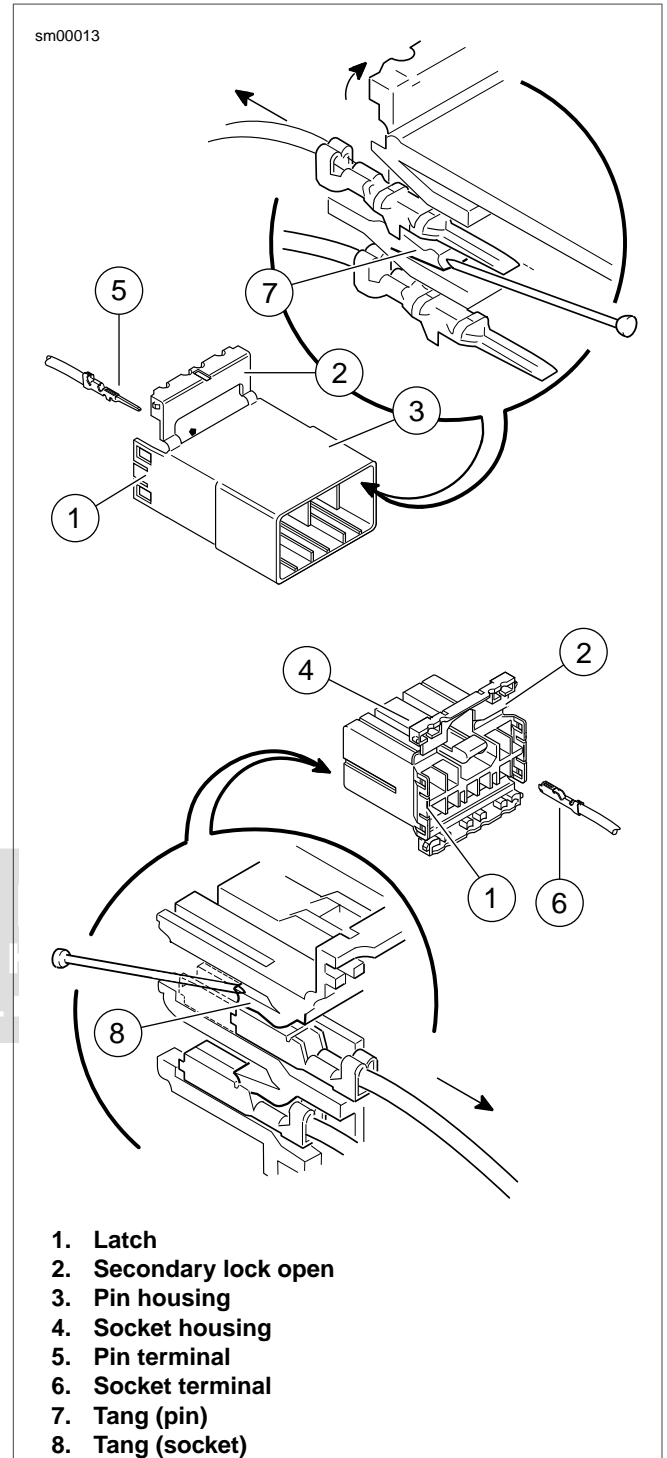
AMP Multilock Connector: Socket and Pin Housings
